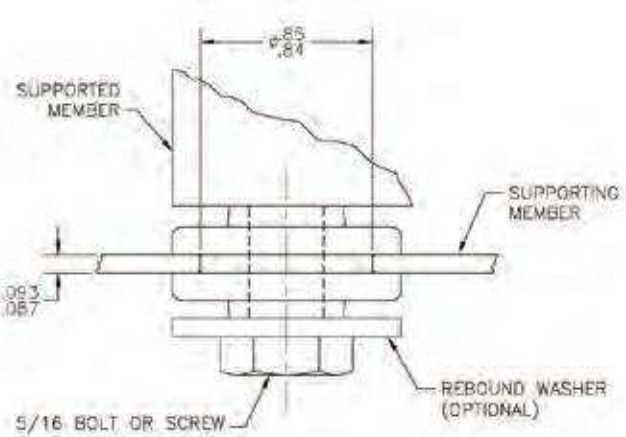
CB-1077-52 INSTALLATION DRAWING
